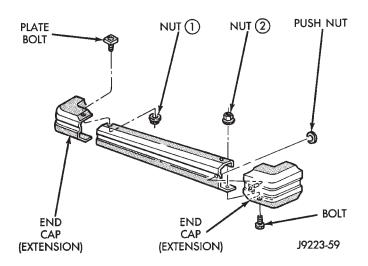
Bumper End Cap Removal/Installation—XJ Vehicles
